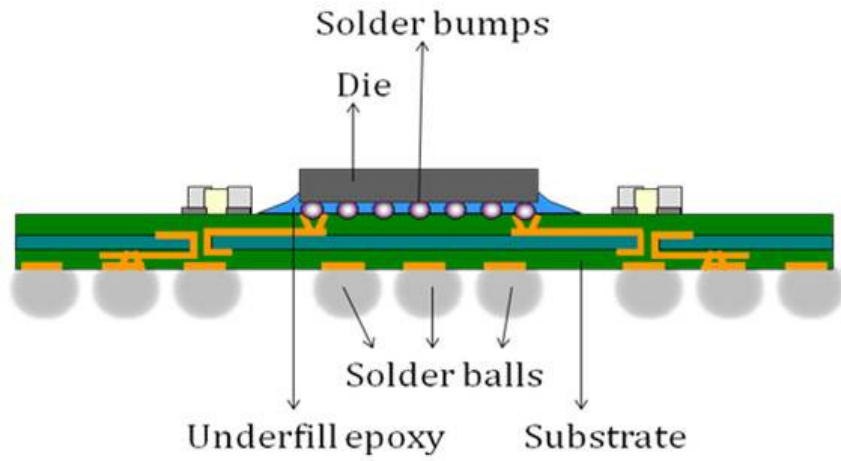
A diagram of a flip chip BGA package and solder connects
